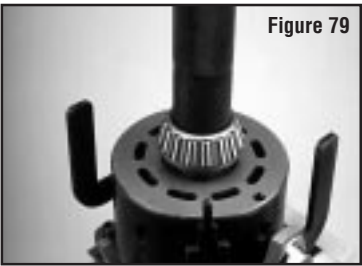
Lubricate and install the rear bearing on the shaft and bearing assembly. Support the shaft assembly in a slightly raised position. Next use a hydraulic press to press the rear bearing cone on the shaft. The bearing cone must be
